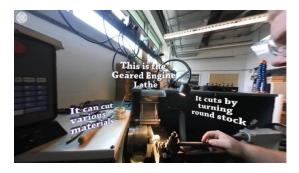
Screenshot of 360° Video of Geared Engine Lathe
